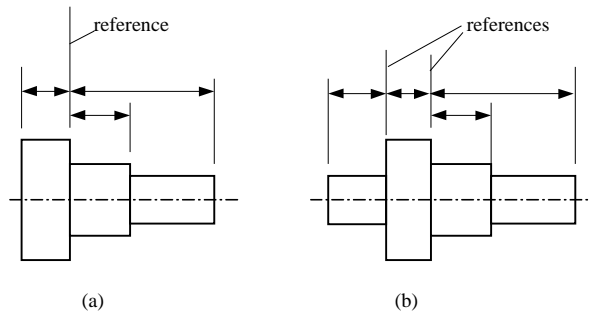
Assembly references for dimensioning (a) dimensioning with one reference; (b) dimensioning with two references
